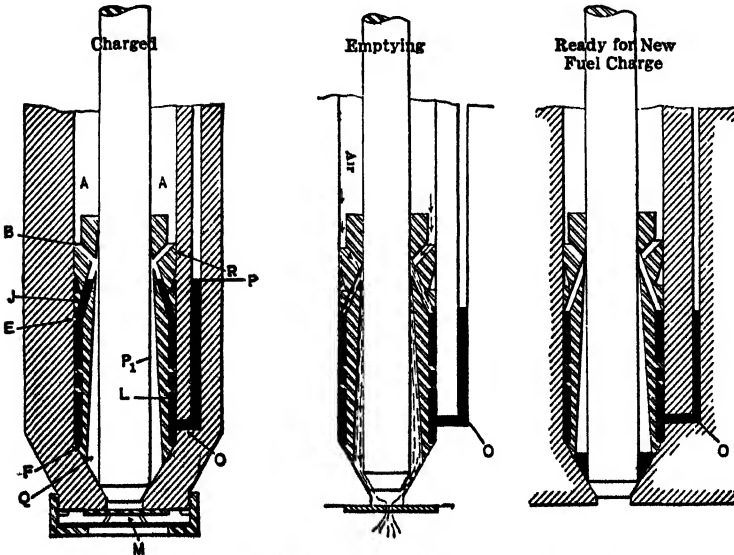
McIntosh & Seymour Hesselmann fuel-valve action.
